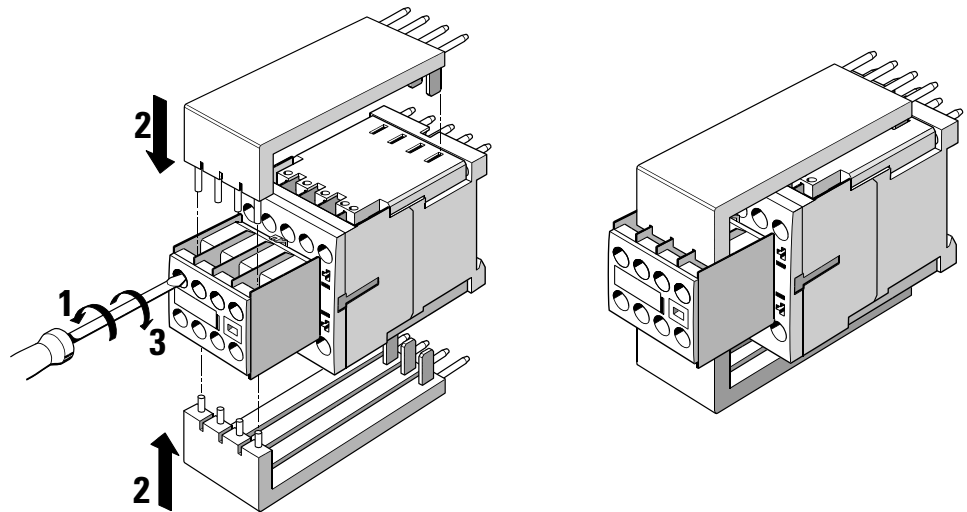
Mounting the soldering pin connection on a 4-pole auxiliary switch block
